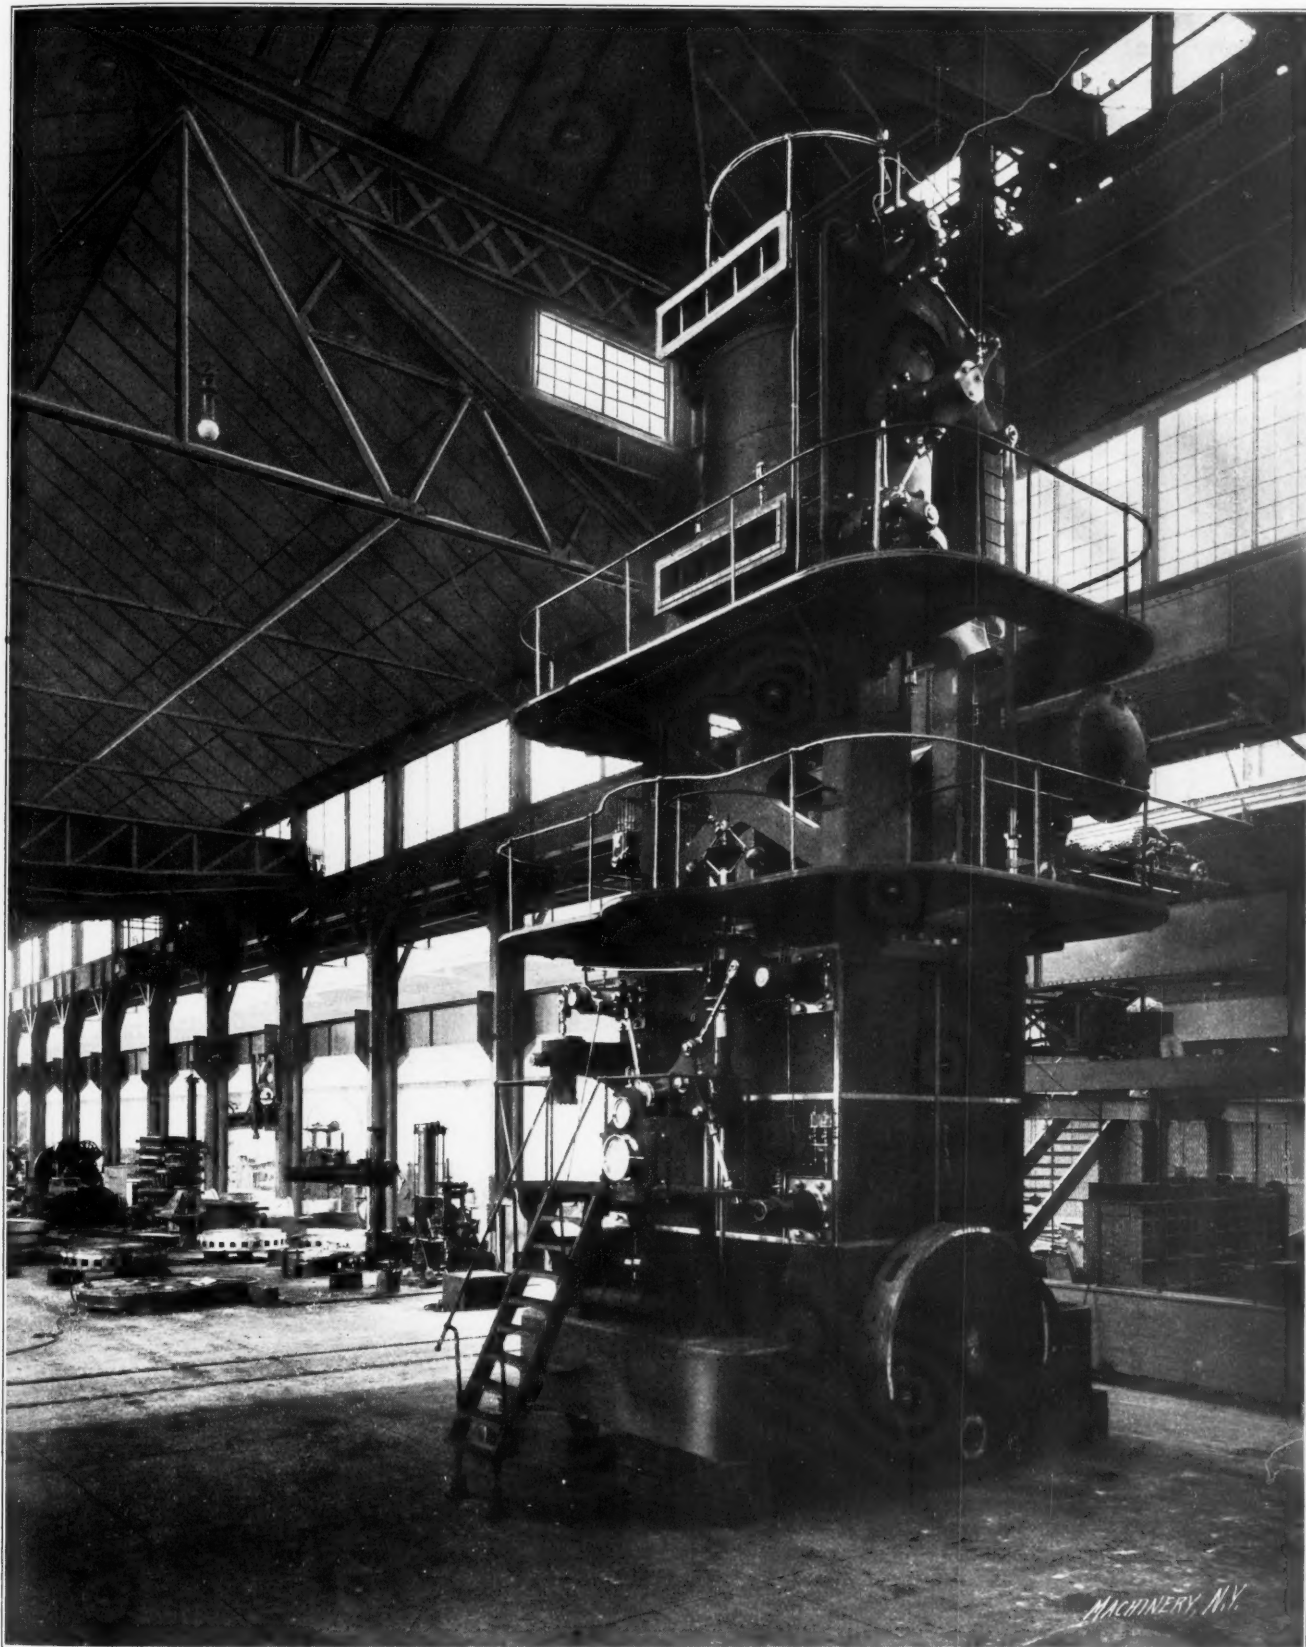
Long Cross-head Type Vertical Blowing Engine built by the Mesta Machine Co.
